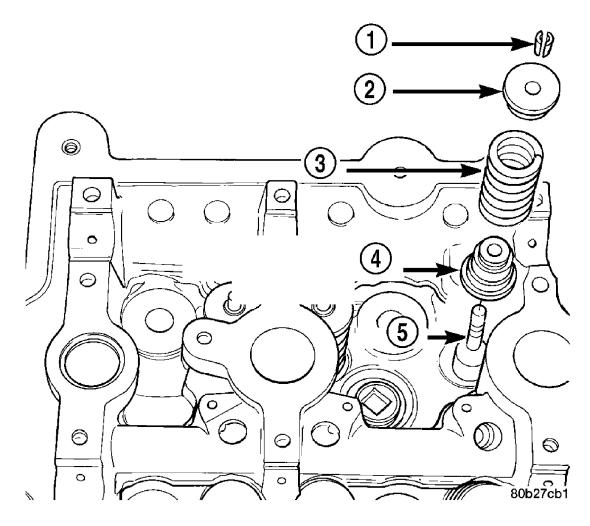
Identifying Valve Seal & Spring Seat Assembly Courtesy of CHRYSLER LLC
